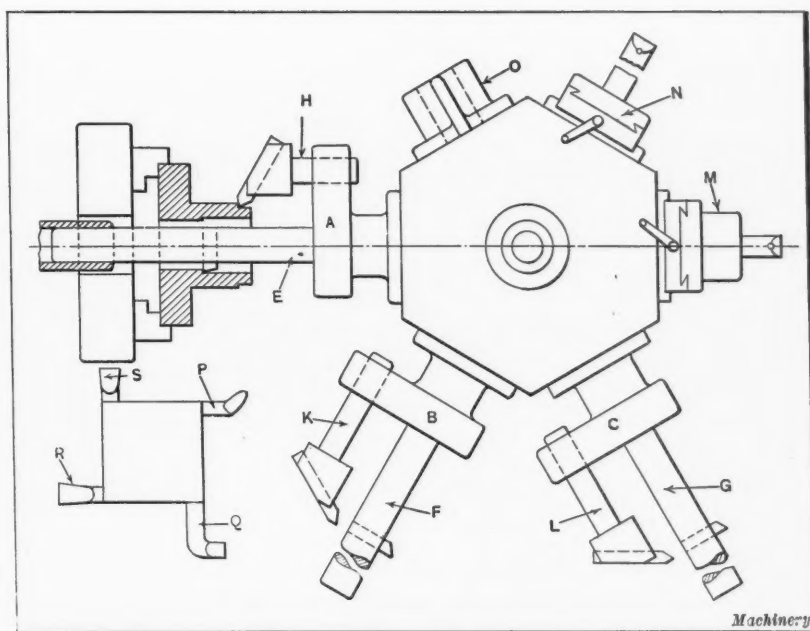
Turret Lathe Tooling Equipment which provides for handling a Large Range of Chuck Work
